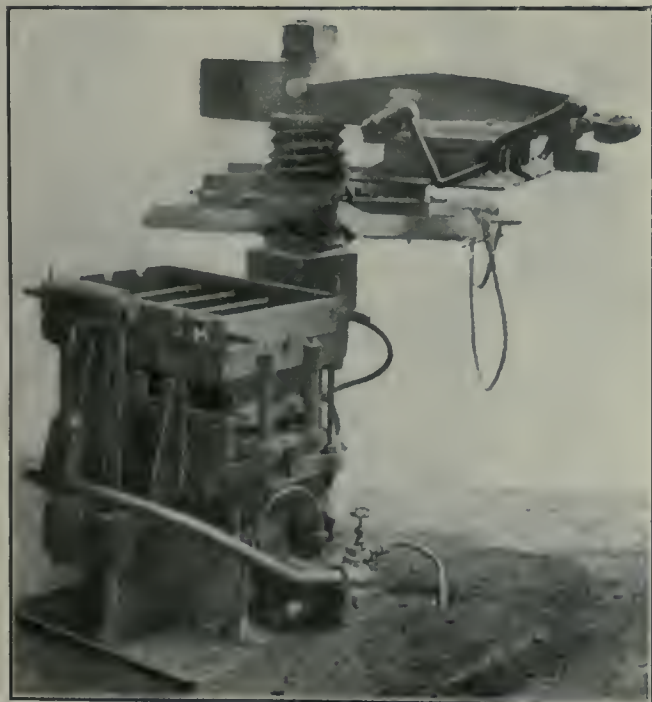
MACHINE OPENED OUT FOR FILLING FLASKS.
